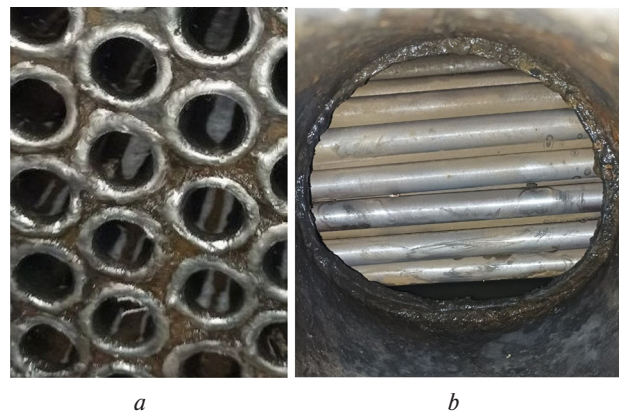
Photographs of the inner (a) and outer (b) top of the heat exchanger tube bundle after cleaning by the hydro-impulse method
